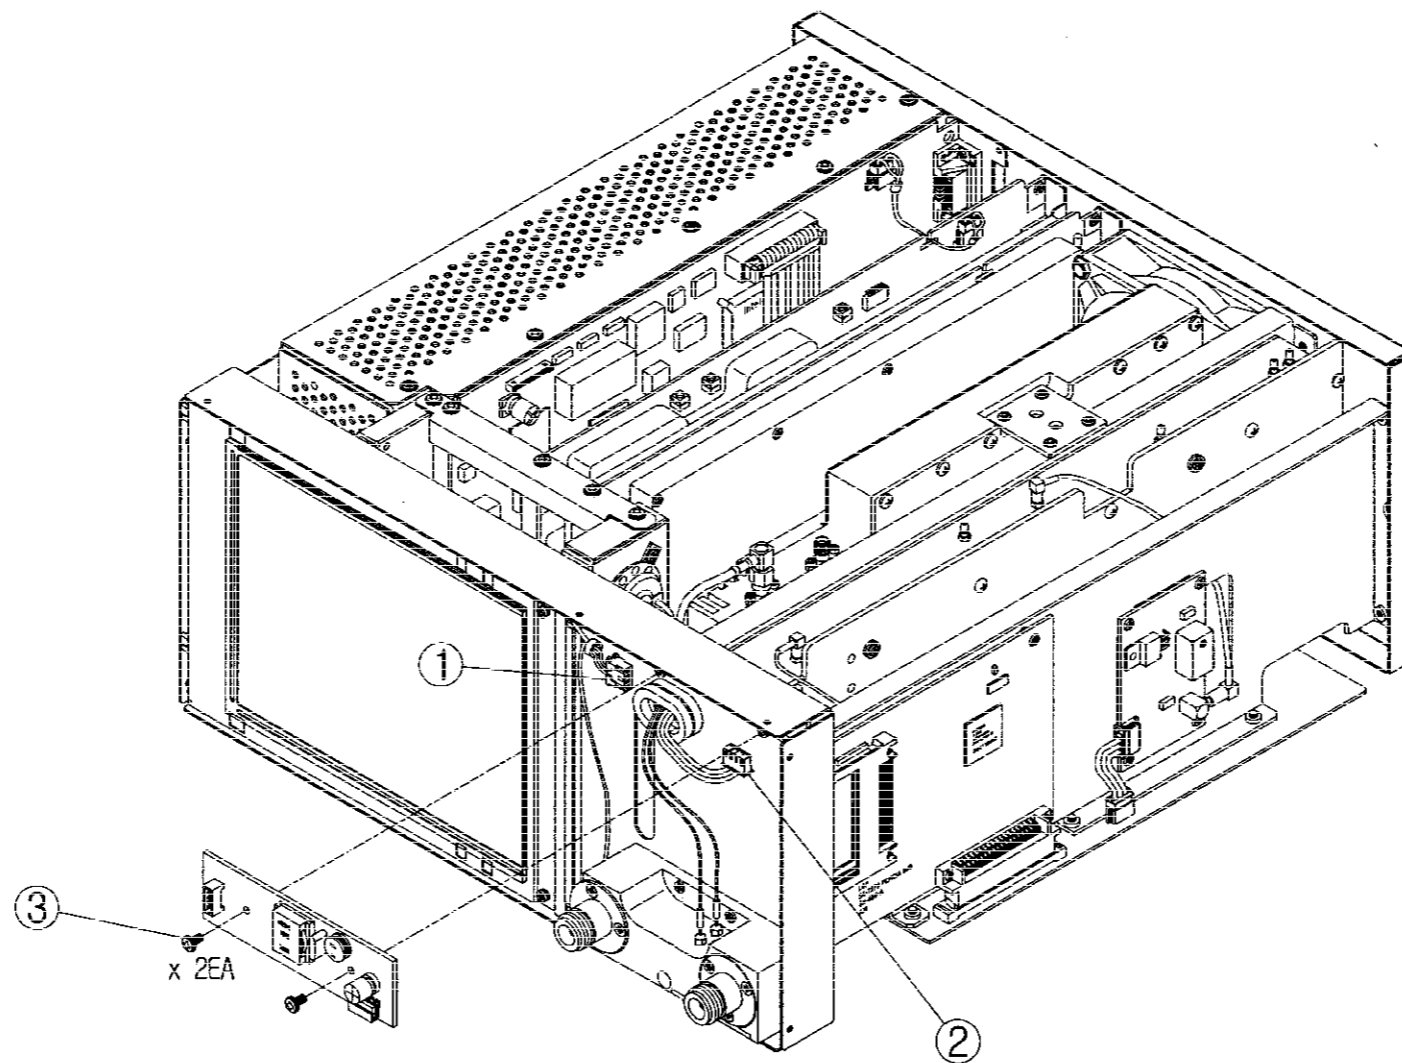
LCD INVERTER BOARD ASSEMBLY
